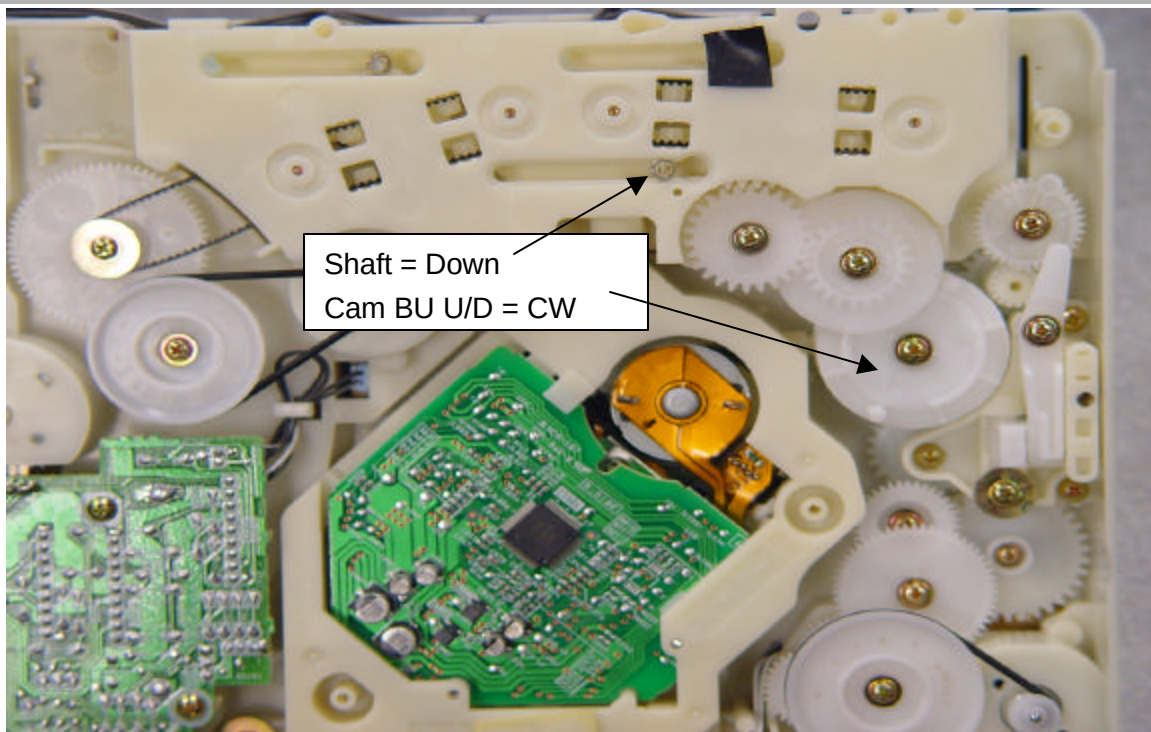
DISC CLAMPED, ROLLERS DISENGAGED MECHANISM POSITION
